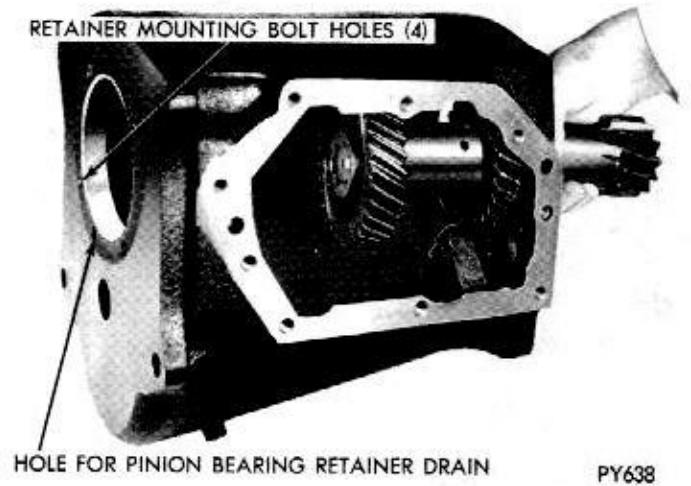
Countershaft Gear and Arbor Assembly—Removal or Installation
